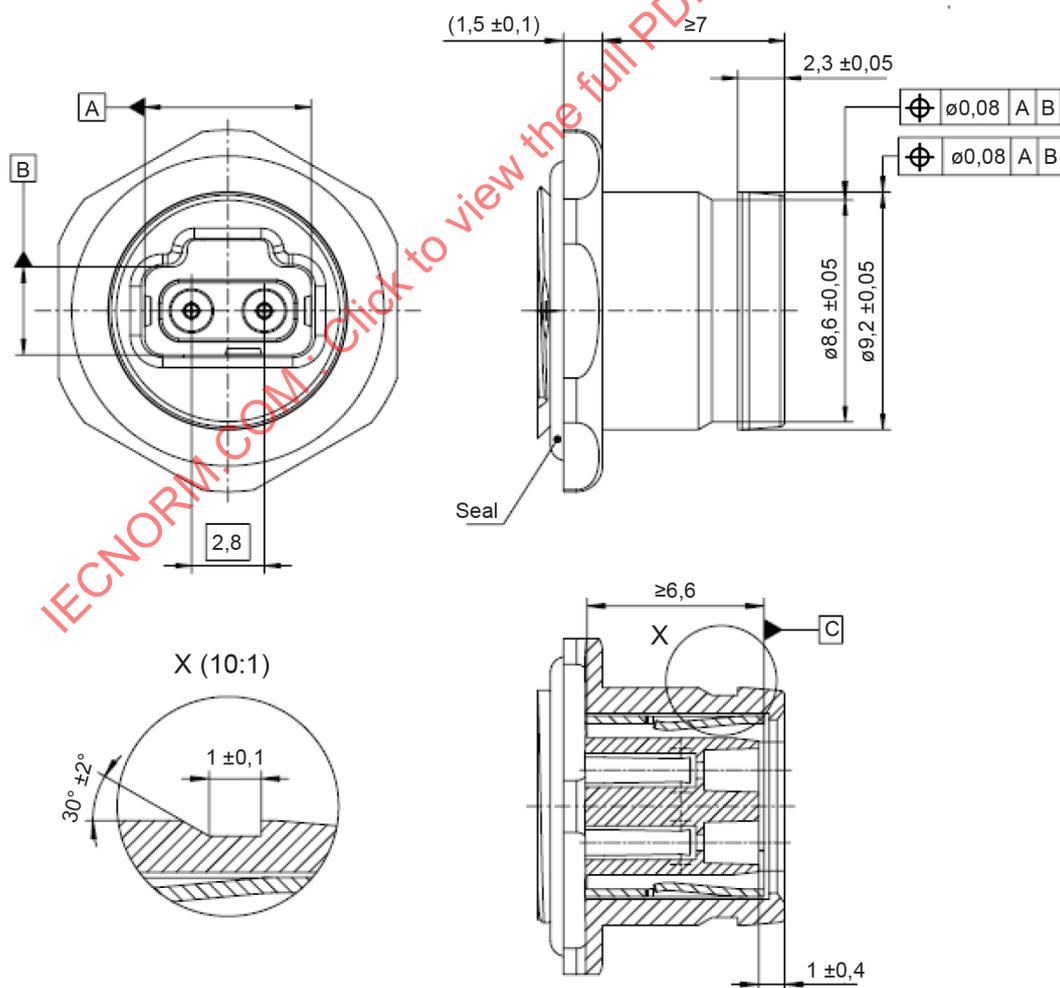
Style 6J-P8, size 8 push pull jack, mating dimensions
